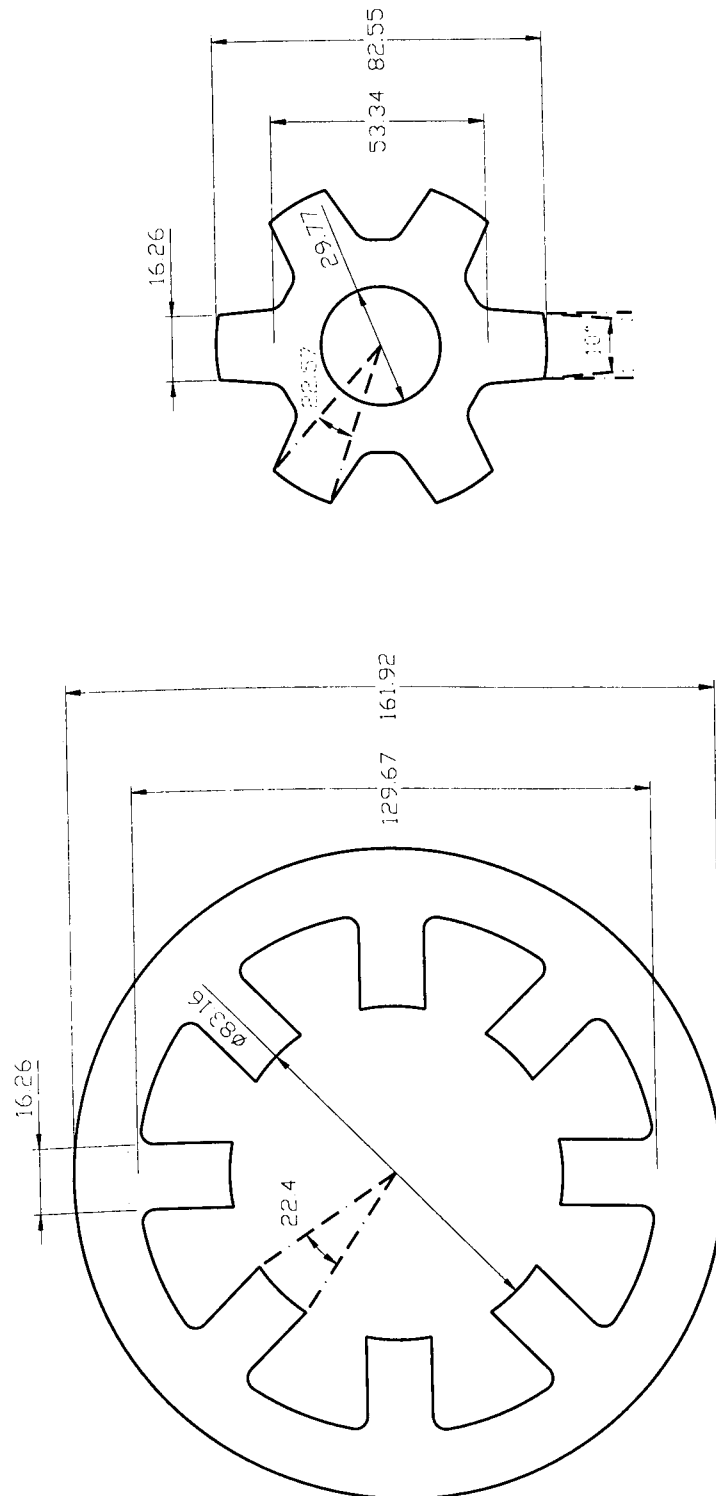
Drawings of lamination of prototype 4-ph 8/6 SR machine
